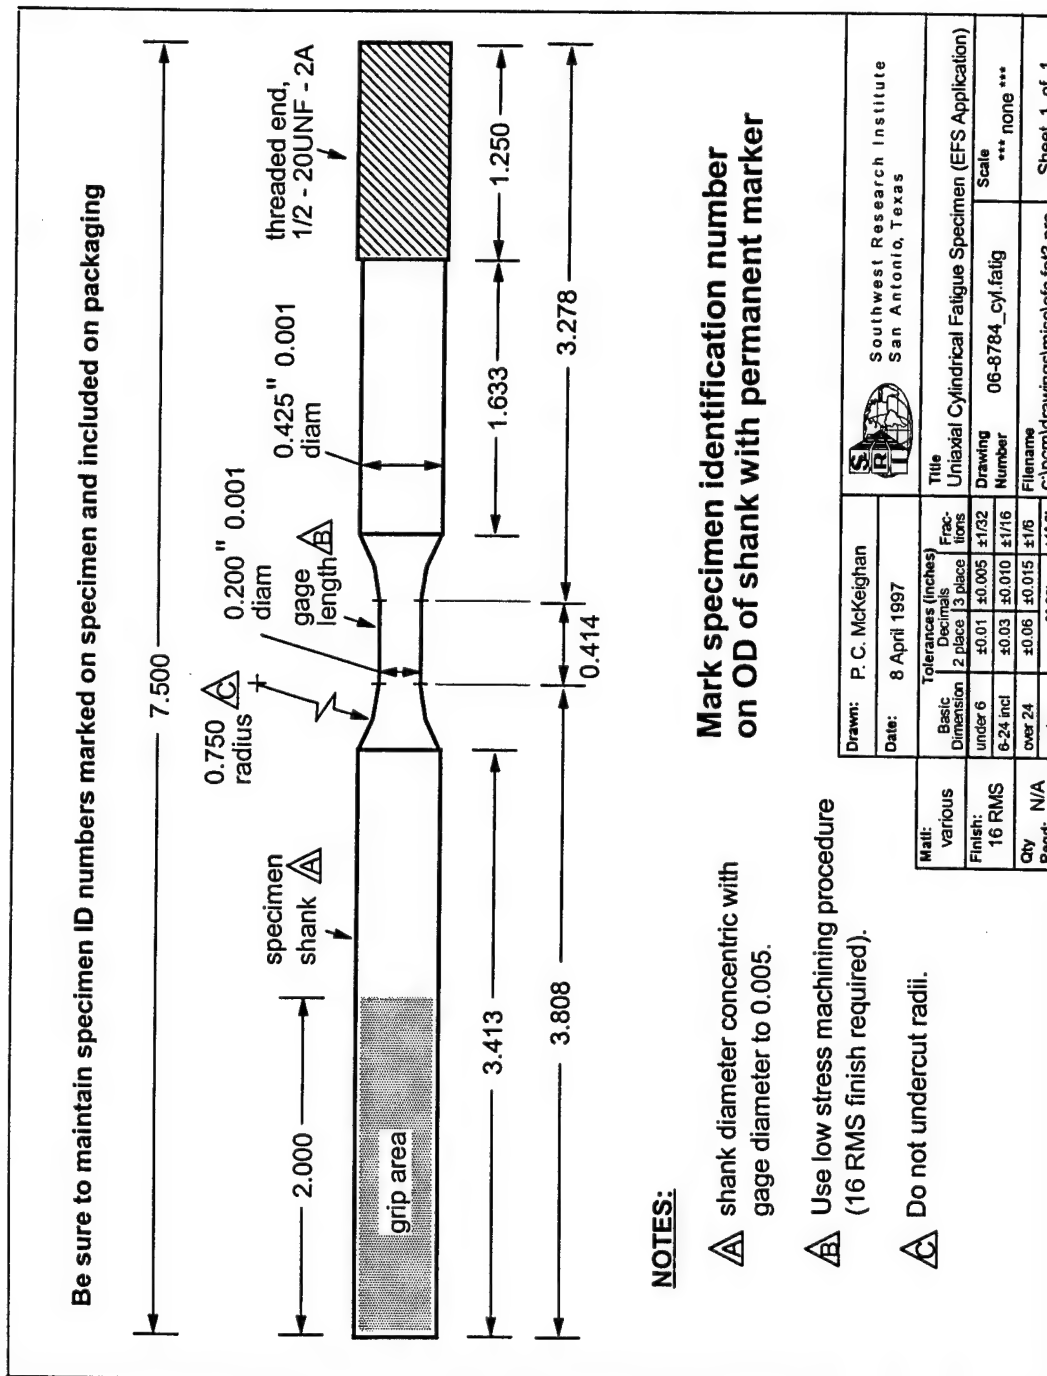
Specimen design used for smooth specimen fatigue testing at SwRI (dimensions in inches where 1 inch=25.4 mm).
